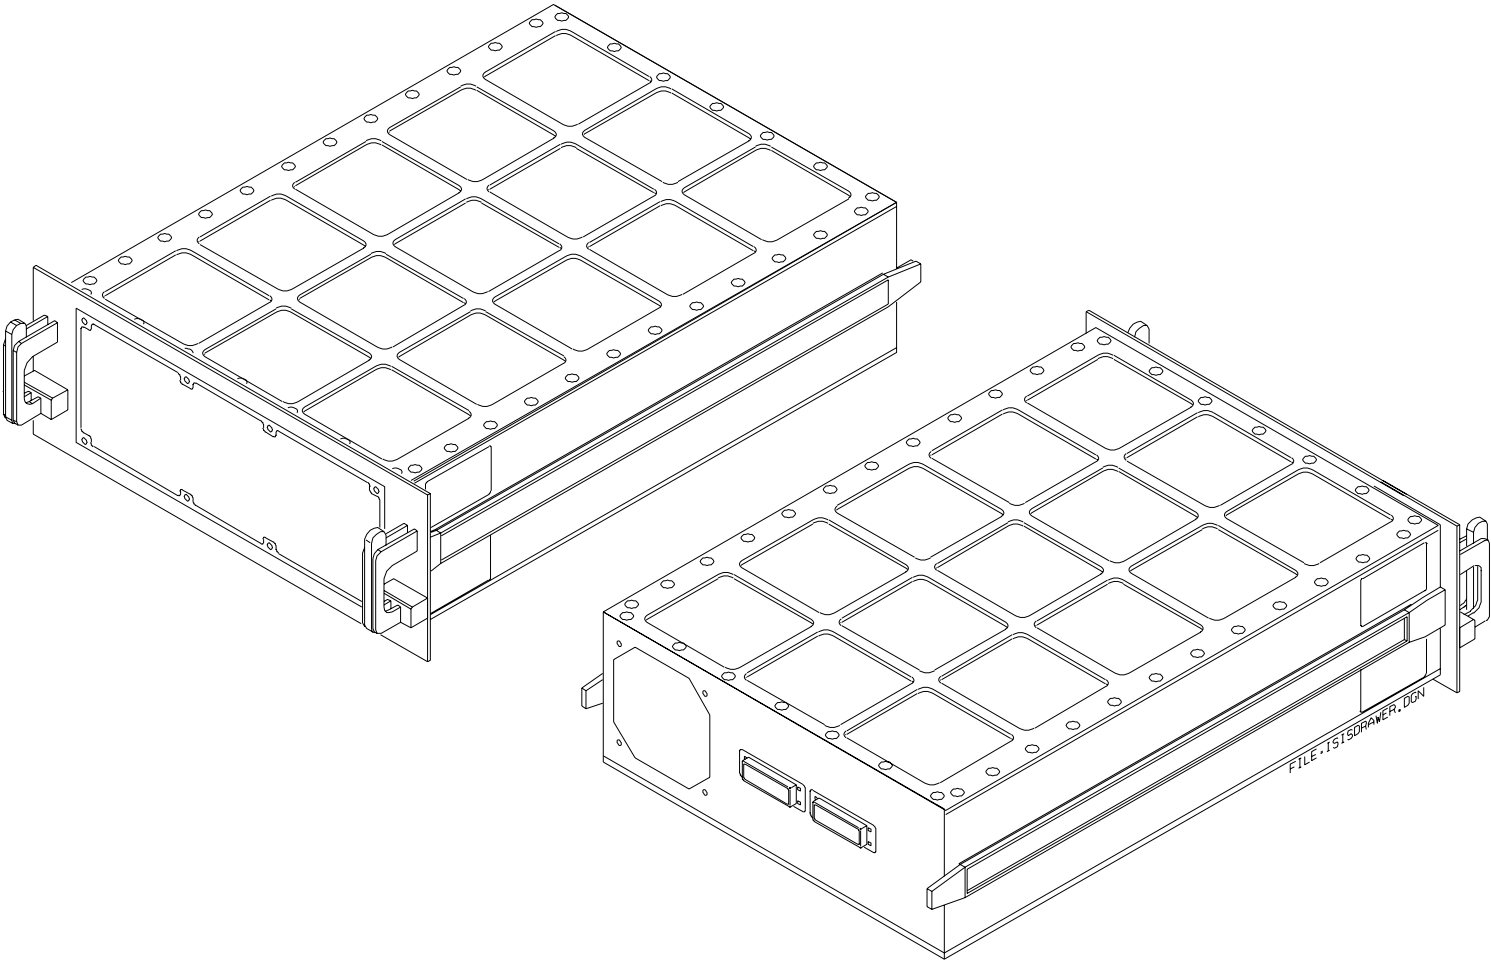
4-PU ISIS DRAWER DIMENSIONAL LIMITATIONS (Sheet 1 of 3)
